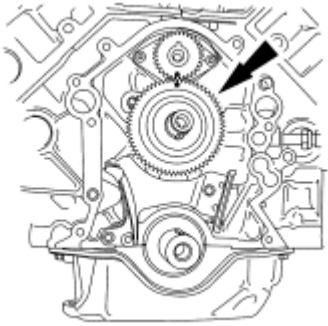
Locating Crankshaft Keyway At 12 O'Clock Position
